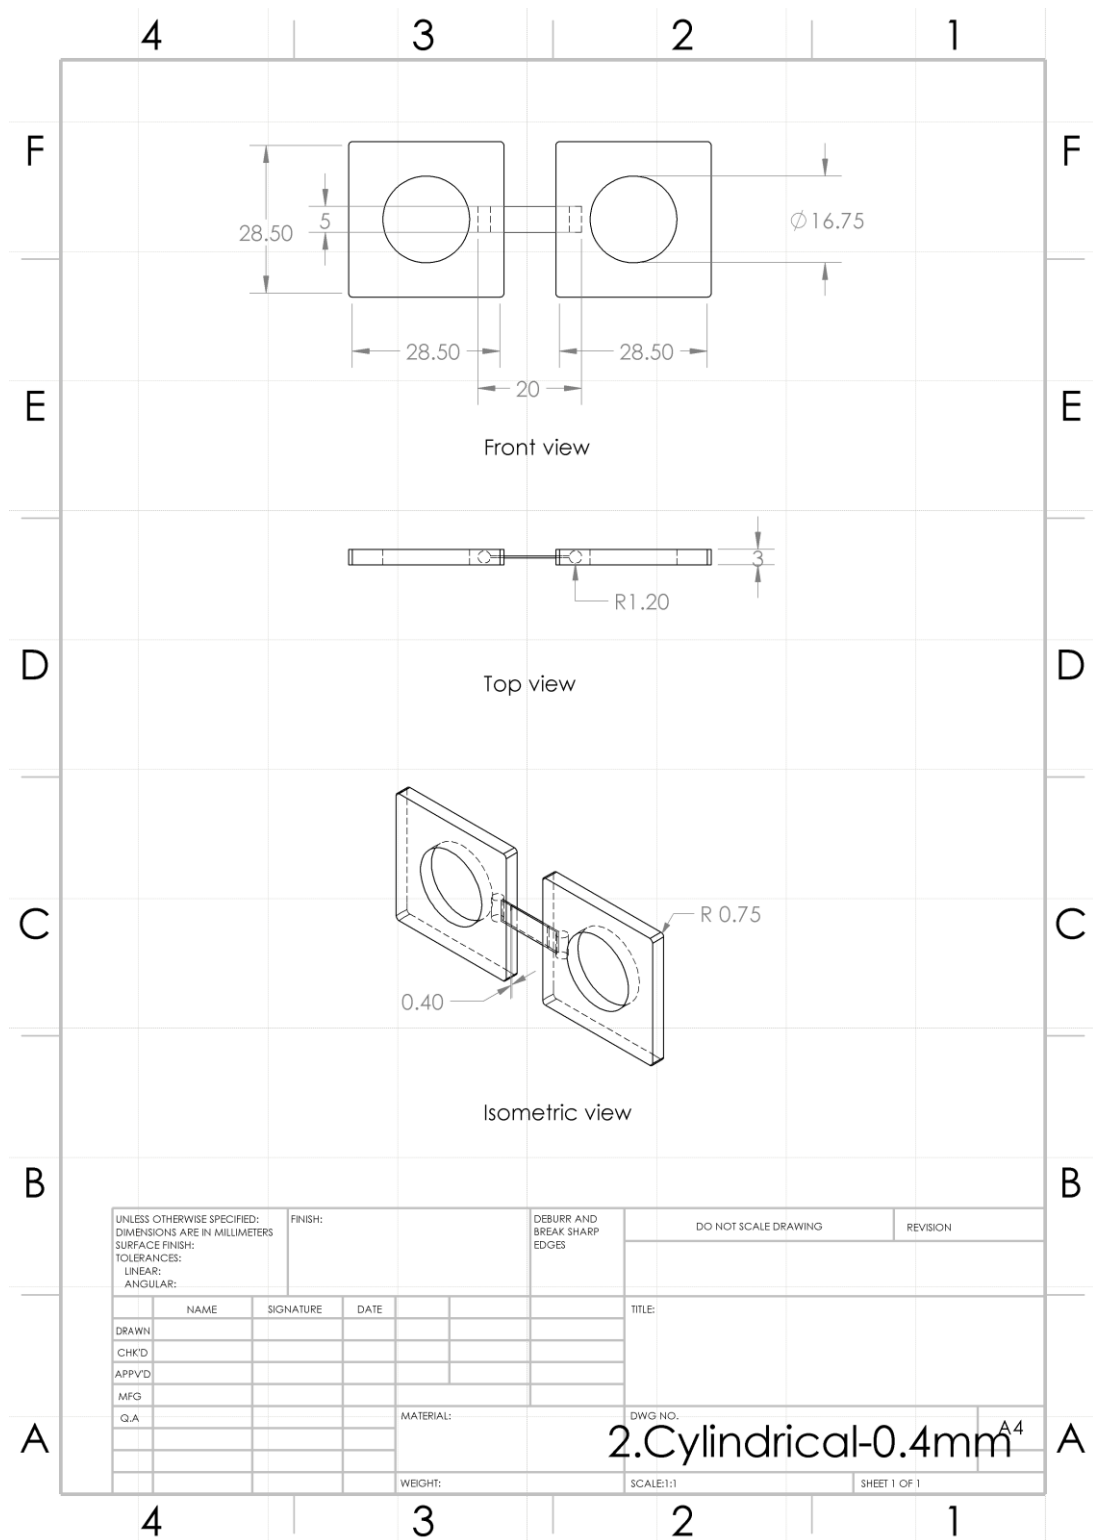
The technical drawing of the bi-material compliant mechanism with cylindrical-shaped interface in 0.4 mm thickness
